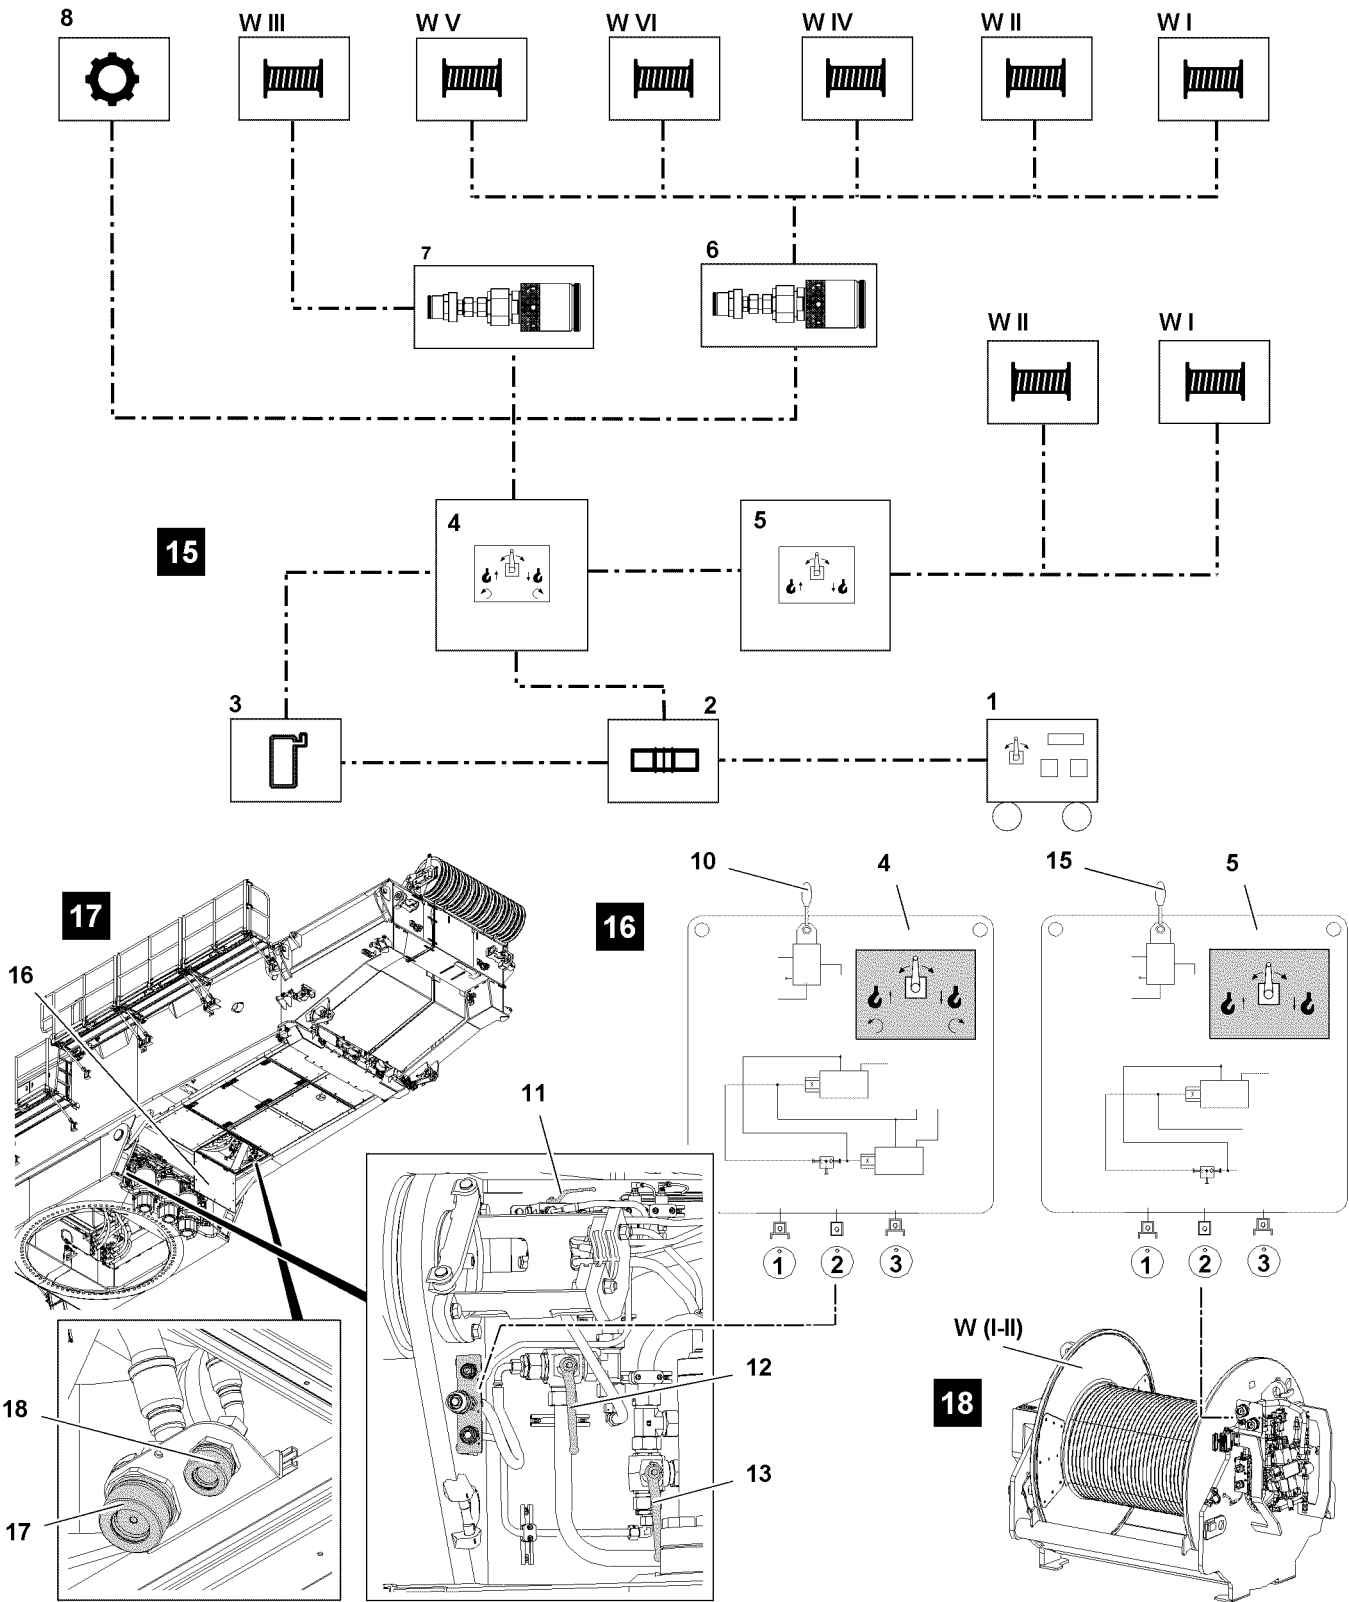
Emergency control slewing gear(s) with assembly plate(s) Variation 2 (V2)
